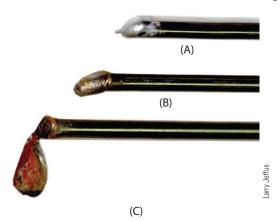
(A) Filler properly protected, (B) some oxides on filler, (C) and excessive oxides caused by improper filler rod manipulation.
